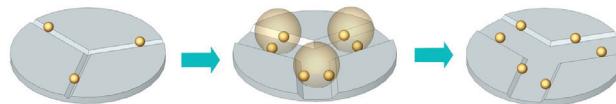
Expand 3-Groove type kinematic mounting from 3 balls to 6 balls.
